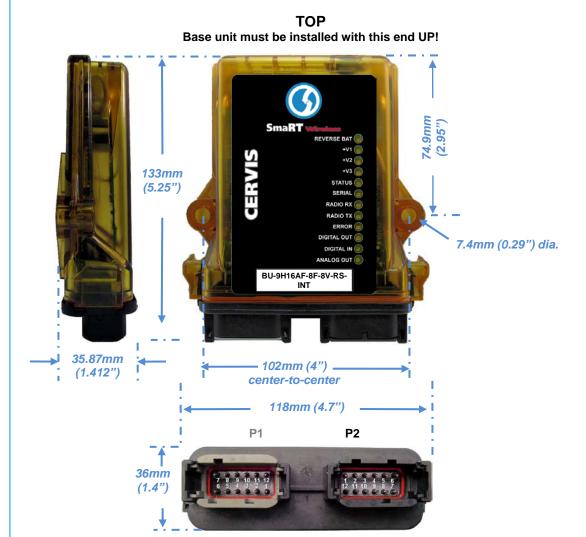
SmaRT BU-9H16AF-8F-8V-RS-INT Mounting Dimensions
